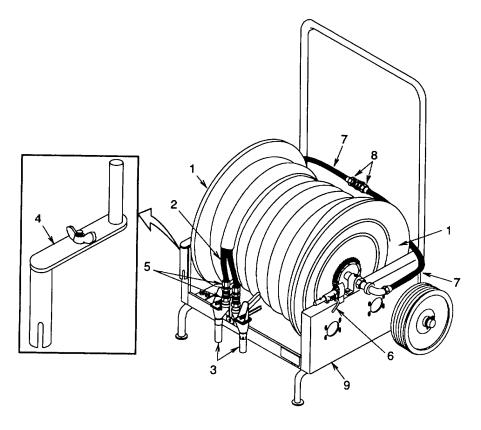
Location and Description of Major Components for the Auxiliary Mobile Hose Reel Cart
